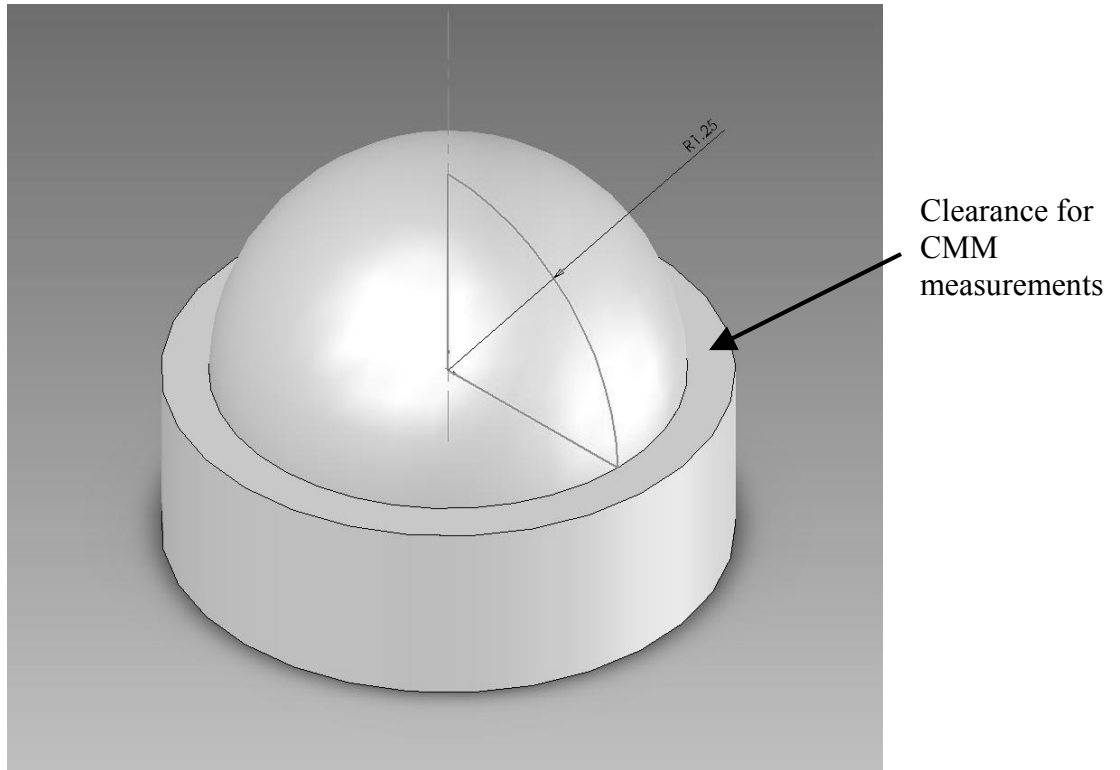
Ideal geometry of test part, radius is 31.75 mm (1.25inches)
